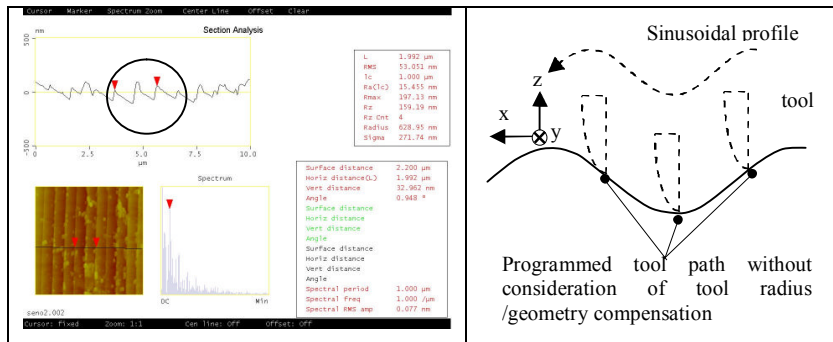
AFM image of the cross section of the machined sample showing cutting tool tip mark generated during machining. Tool path model without considering tool radius/geometry compensation. The half radius may not be appropriated to machine such surface.
